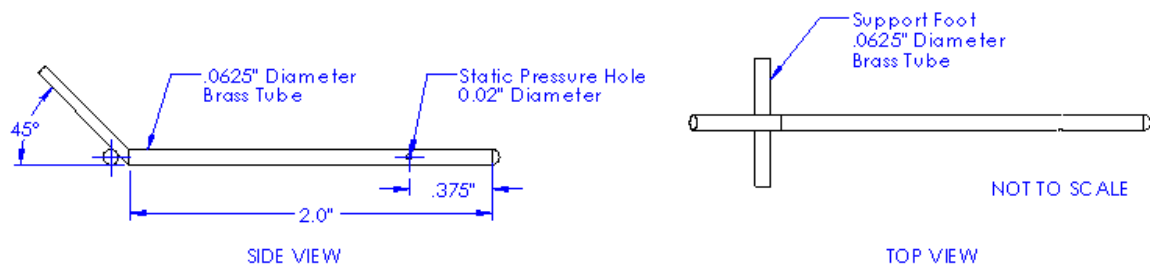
Surface static tube design by Sproston and Göksel [13]
